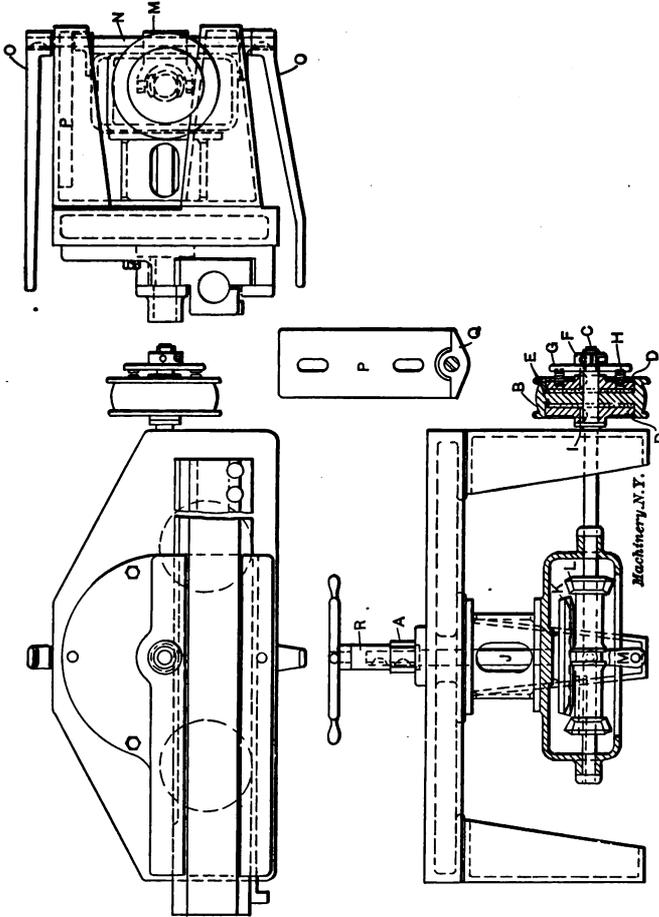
Machine for Imparting Motion to Boring Mill Flans while Scraping
